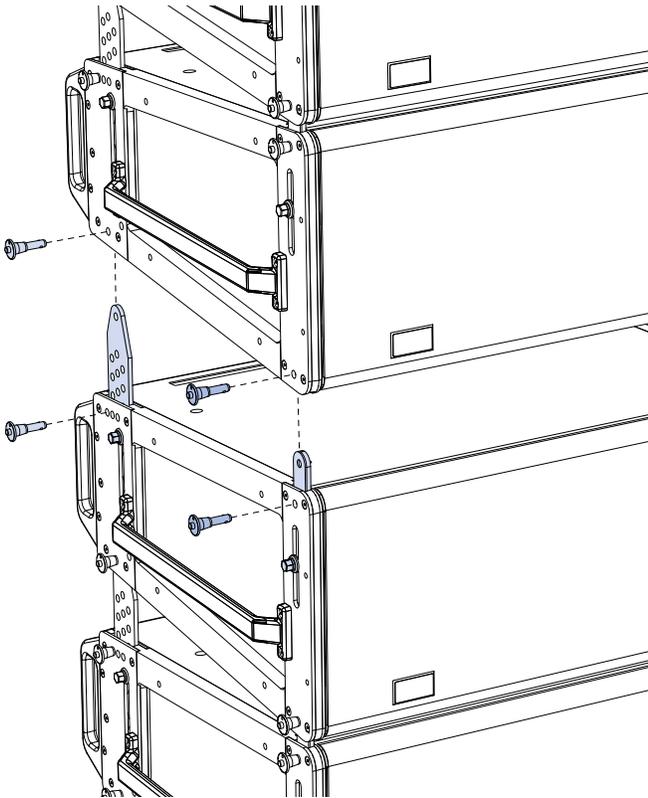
LEOPARD GuideALinks with Quick-Release Pins, Exploded View
